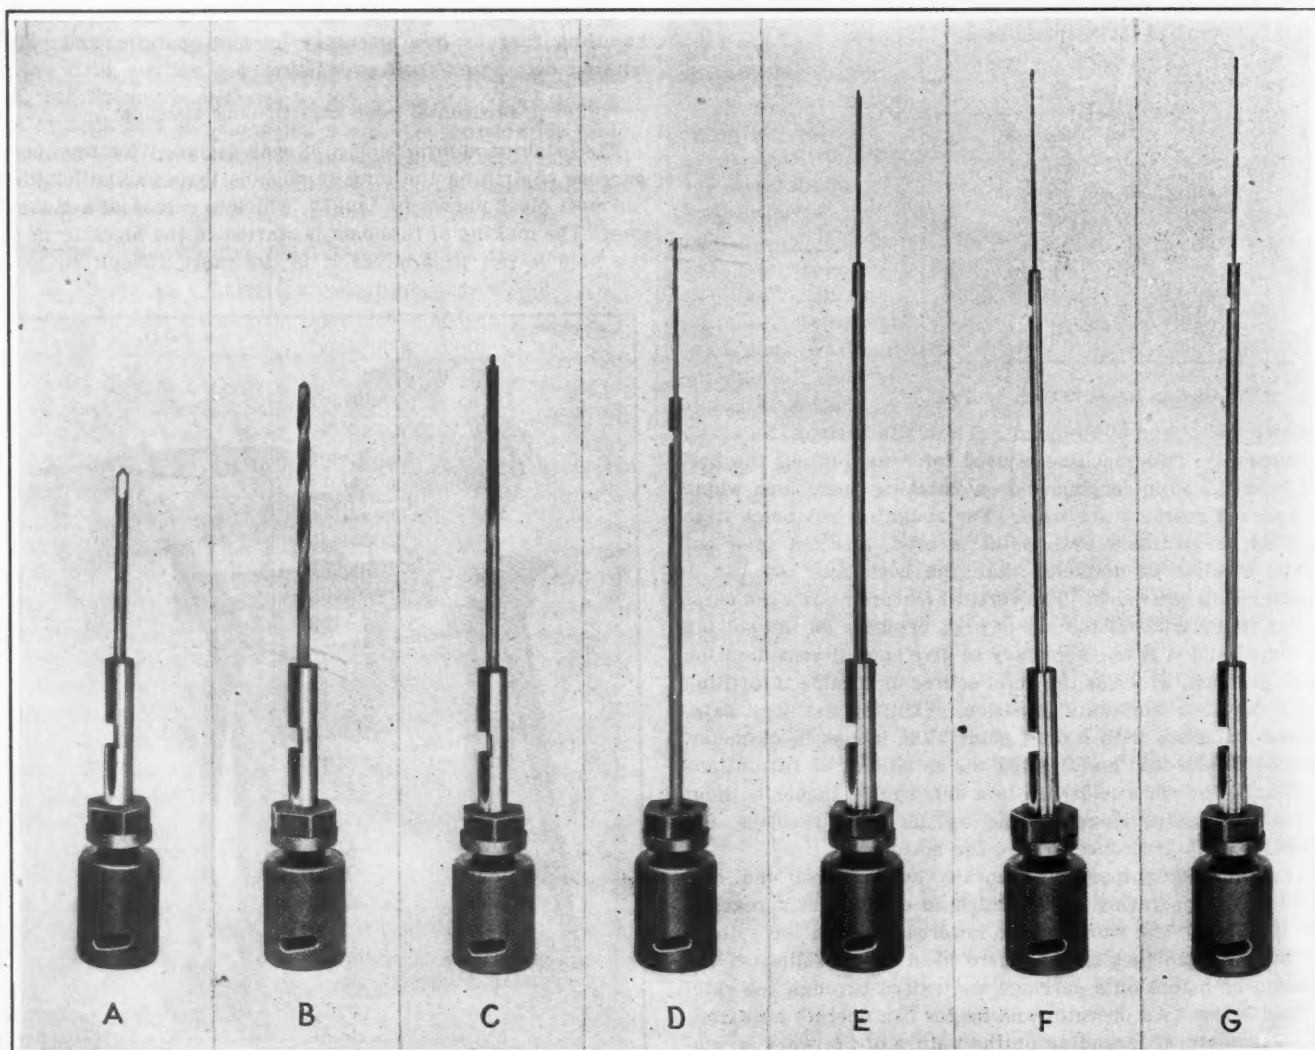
Tools used in Machine shown in Fig. 38 to produce Hole in Part shown in Fig. 39
